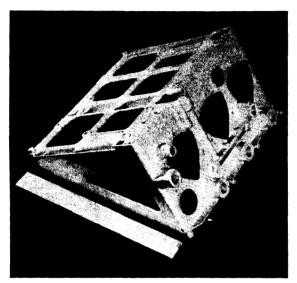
Close tolerances and dimensional stability can be obtained in die casting by proper design. Each of the cored holes and bosses of this part has to be accurately located since it serves as a mounting or locating point in an assembly. The part is a magnesium casting for an automatic aircraft pilot base.
